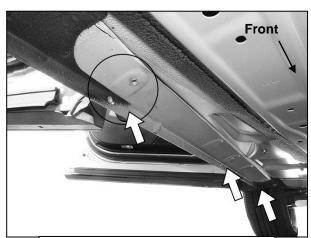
Hole drilled through pinch weld and threaded Insert installed (arrows)
